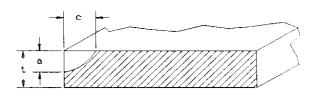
STANDARD CRACK/PART GEOMETRIES
